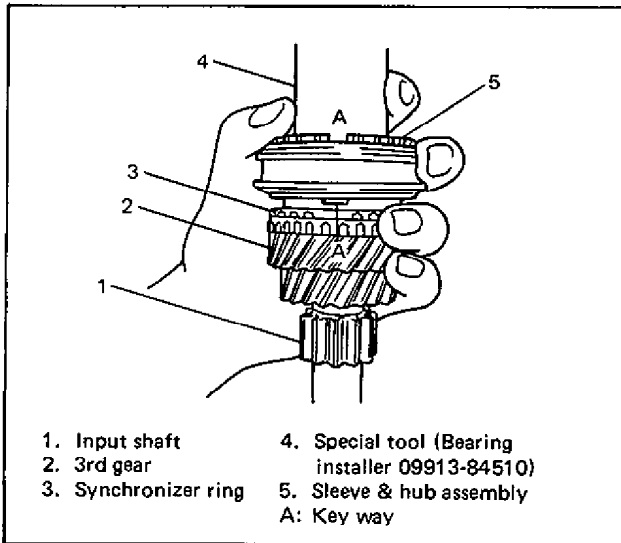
A-53 Press-fitting High Speed Sleeve & Hub
